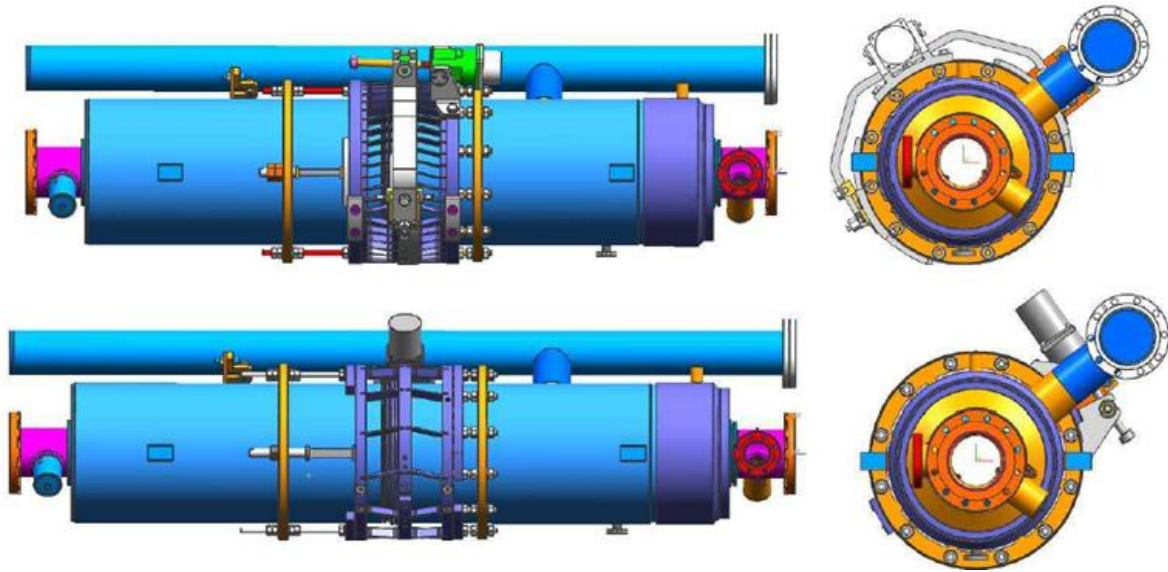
Original and revised design Blade Tuners installed on a modified He tank, lateral (left) and frontal (right) views.
